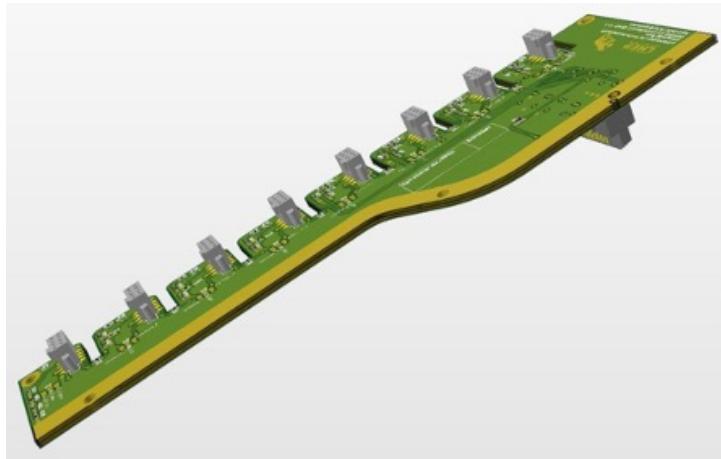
CAD drawing of the Connector board. The connectors to the Optoboards (top) and to the Powerboard (bottom) are shown.
